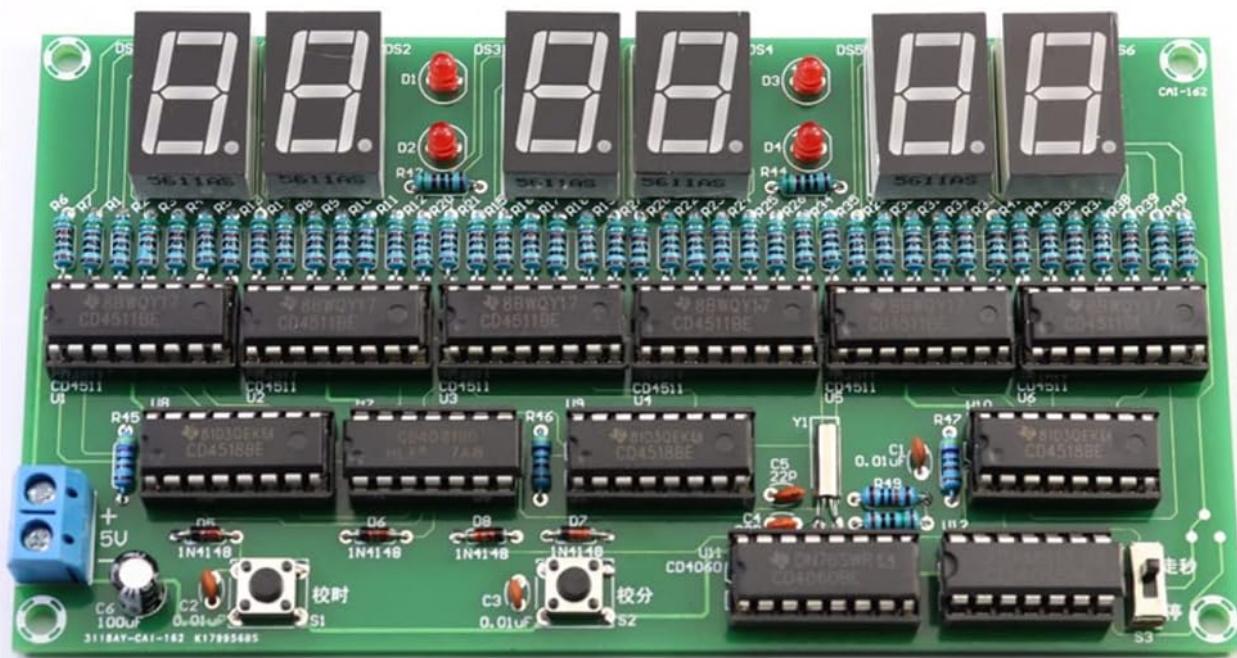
Illustration of soldering IC sockets, tact switches, and LEDs.
